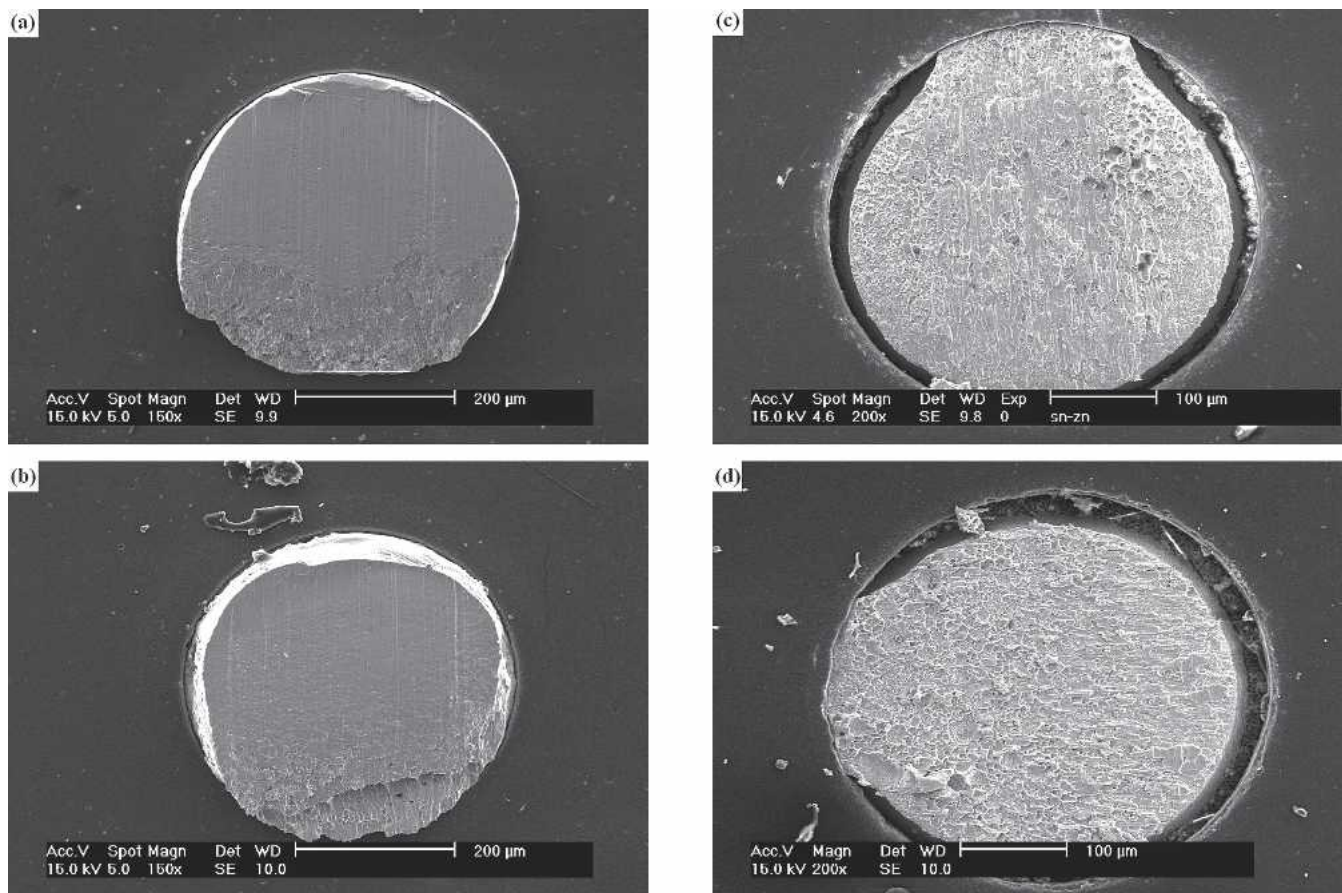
Typical fractography of ball shear tested solder joints in Sn-9Zn BGA packages with Au/Ni/Cu and Ag/Cu pads after aging at various temperatures: (a) Au/Ni/Cu pads, 100°C aging; (b) Au/Ni/Cu pads, 150°C aging; (c) Ag/Cu pads, 100°C aging; and (d) Ag/Cu pads, 150°C aging.
